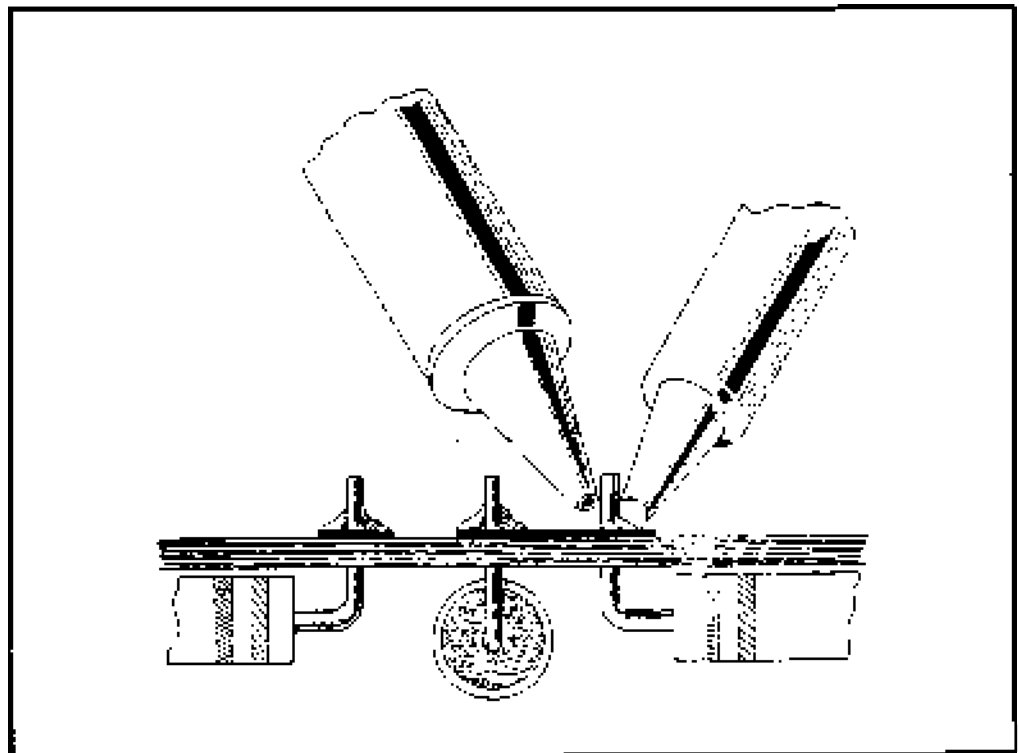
To de-solder, melt the solder with the iron and use a solder sucker to remove the solder.
